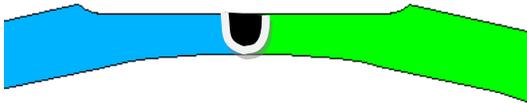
Assumed fusion zones – welds 1 - 8
